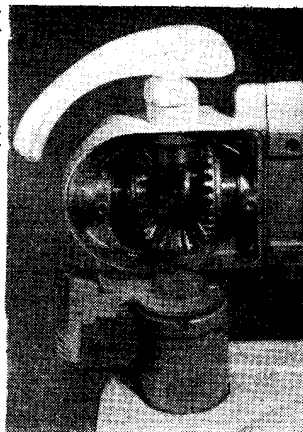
Wringer is fitted with a Swirlux gearbox seen here with outer casing and one coverplate removed
